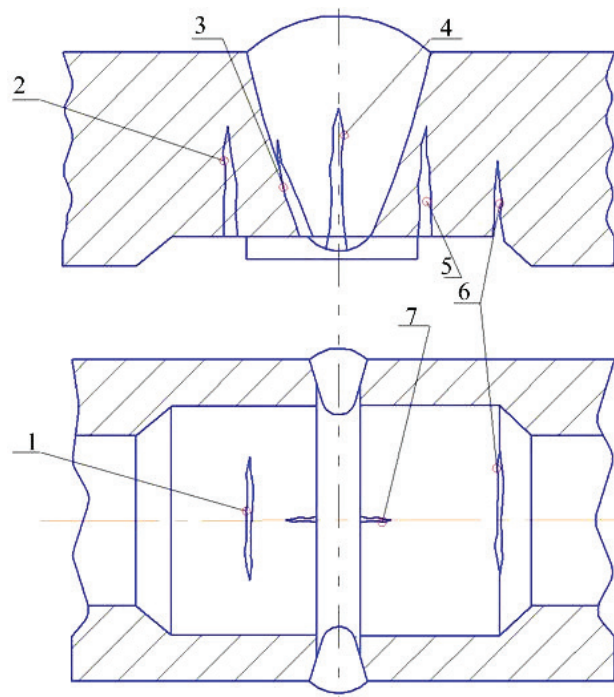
Fatigue cracks, which are formed in the butt-welded joints of steam pipelines: 1 – at the section of incomplete recrystallization of HAZ; 2 – at the section of overheating; 3 – at the section of fusion; 4 – in the weld metal (transverse cracks); 5 – near the backing ring; 6 – in the place of contact between steam pipelines of different thicknesses; 7 – in the weld metal (longitudinal cracks)
